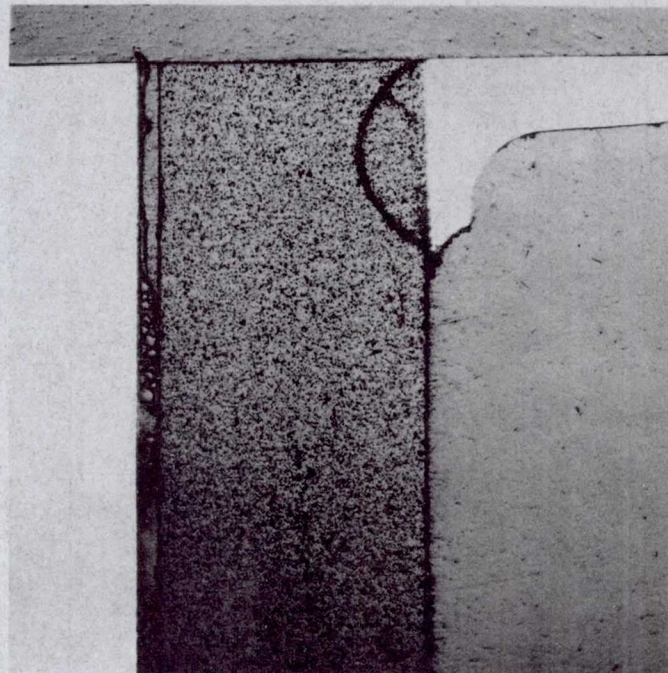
Section of Ceramic-to-Metal Seal Showing Hemispherical Crack in Ceramic
